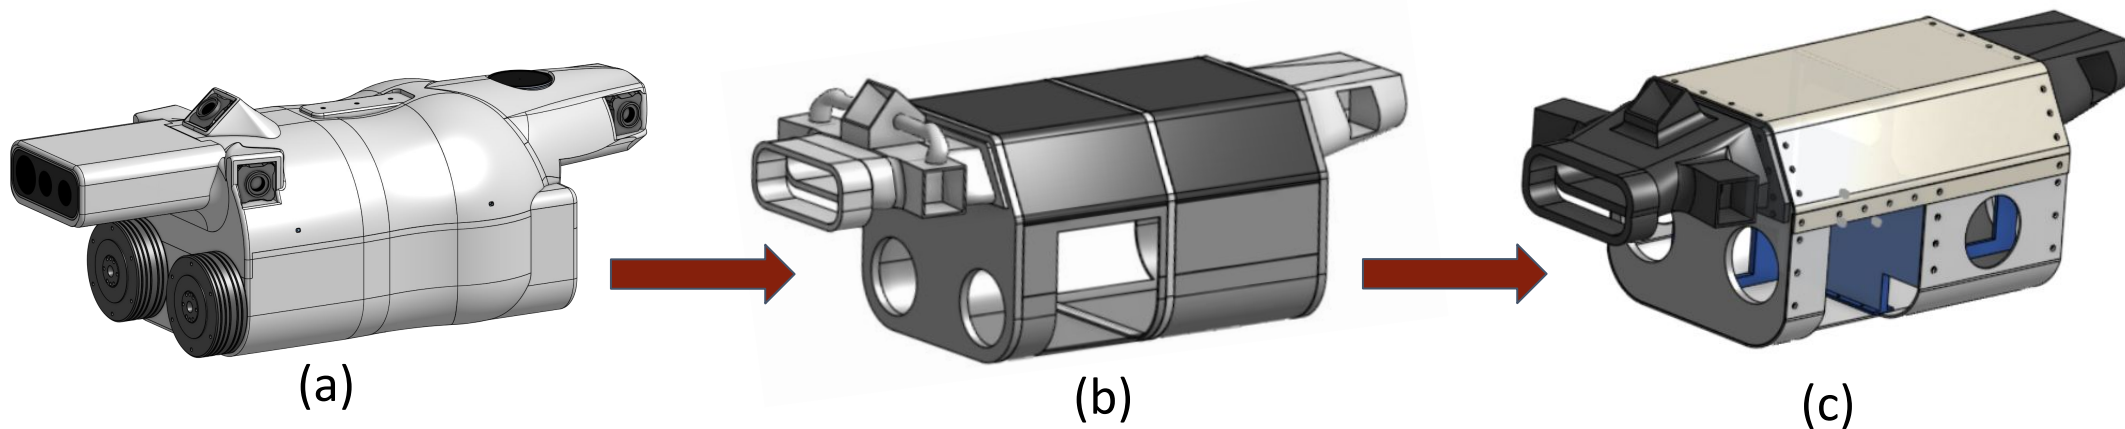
Body design iterations. (a) 3D printed design. (b) Four-piece sheet metal design. (c) Chosen two-piece sheet metal design
